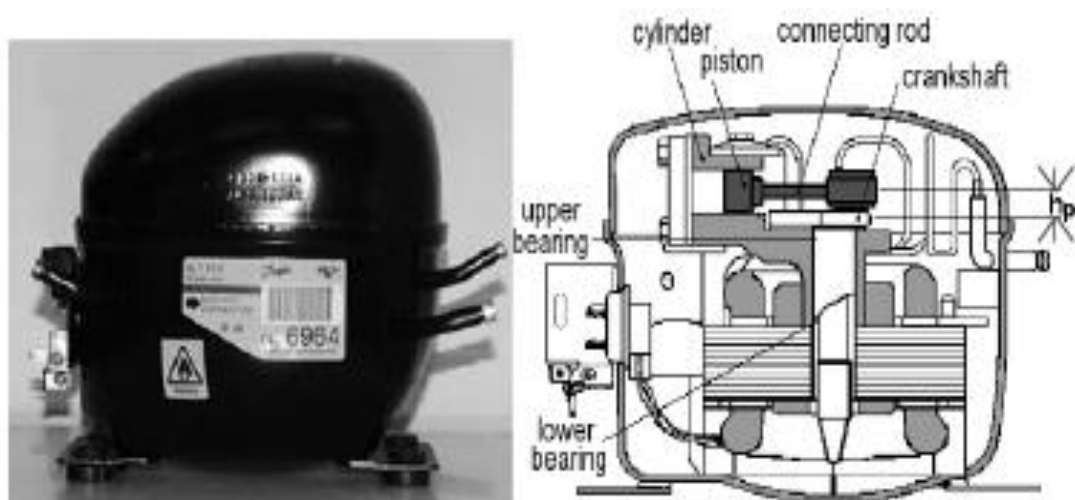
A typical hermetic compressor (Compressor, n.d.).
